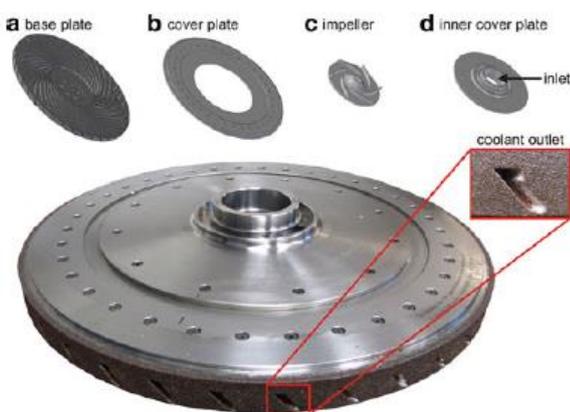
Grinding Wheel with Internal Cooling Lubricant Supply
